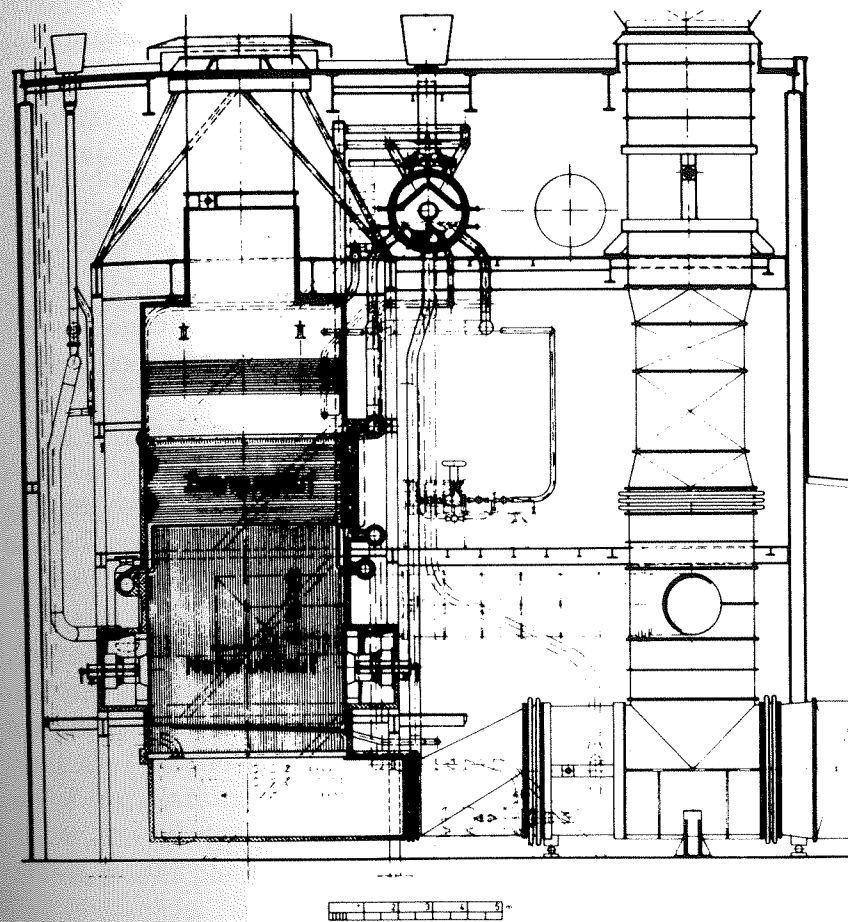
Waste Heat Boiler with Limited Supplementary Firing and Cooled Combustion Chamber
